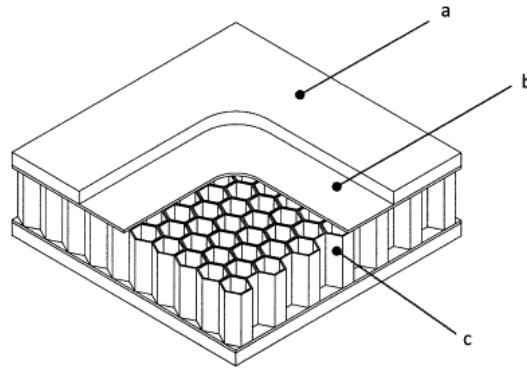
Skin CFRP plyes (a), Adhesive Layer (b), Aluminium Honeycomb core (c)
